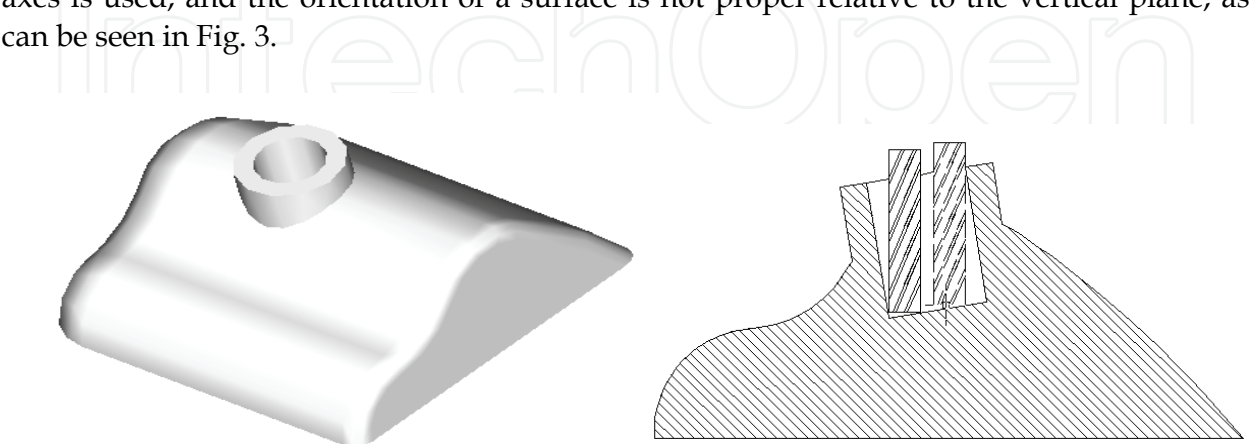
Part which cannot be processed (the hole because it's inclination) on a 2 ½ or 3 axes CNC machine tool
